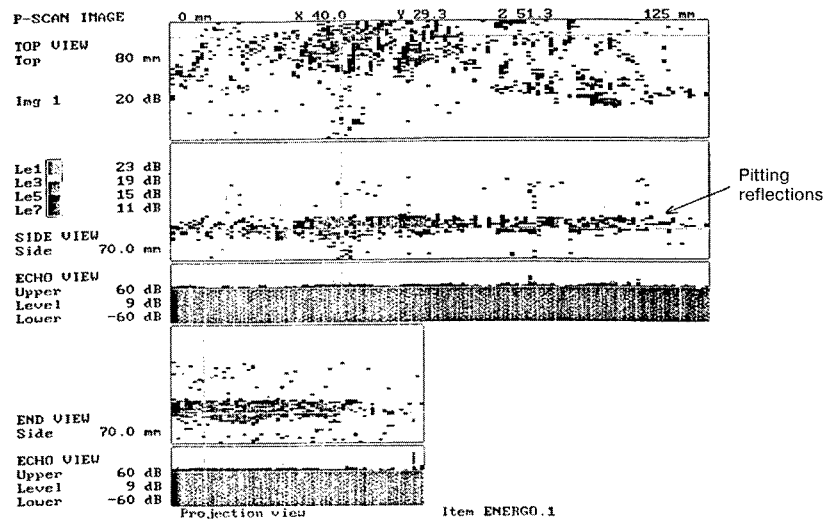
Case of weak pitting corrosion coming to the metal surface
